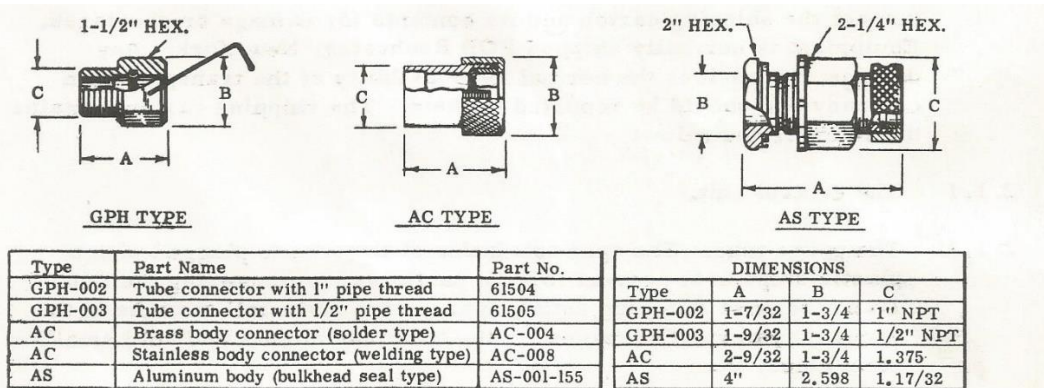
TYPICAL GAUGE TUBE CONNECTORS FOR NOMINAL 1" O.D. TUBULATION
